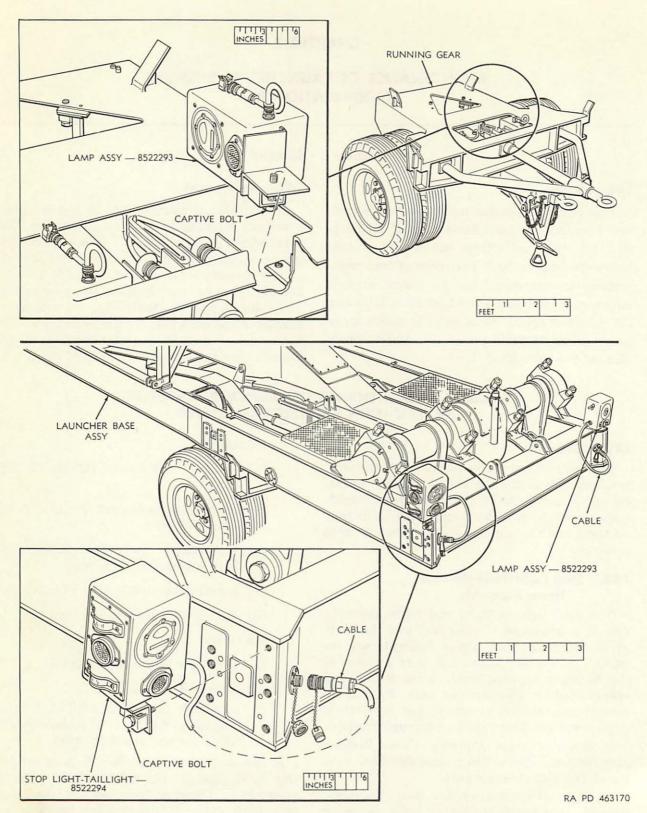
Stop light-taillight and lamp assembly - removal and installation.
